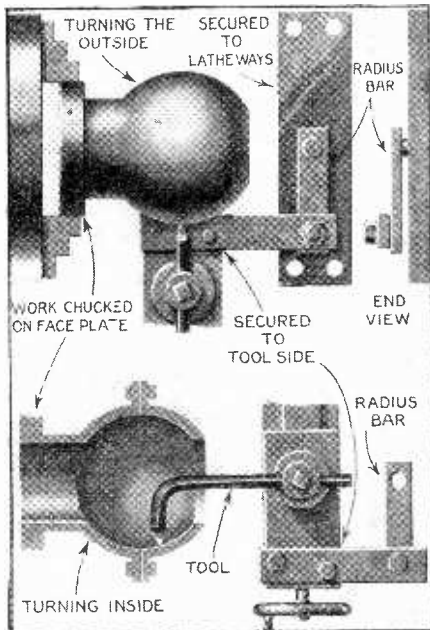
Methods of turning the inside and outside balls in a lathe.
